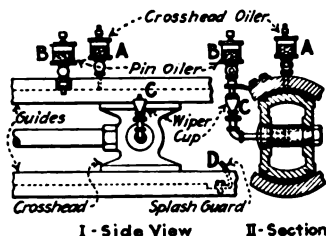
Method of using wiper cup in oiling crosshead pin
